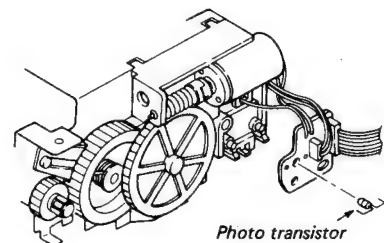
Replacement photo transistor on FL P.C. board (R)
